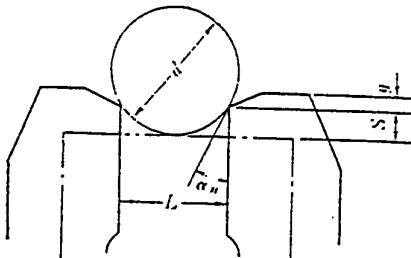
Adjusting the zero point of a gear-tooth micrometer
